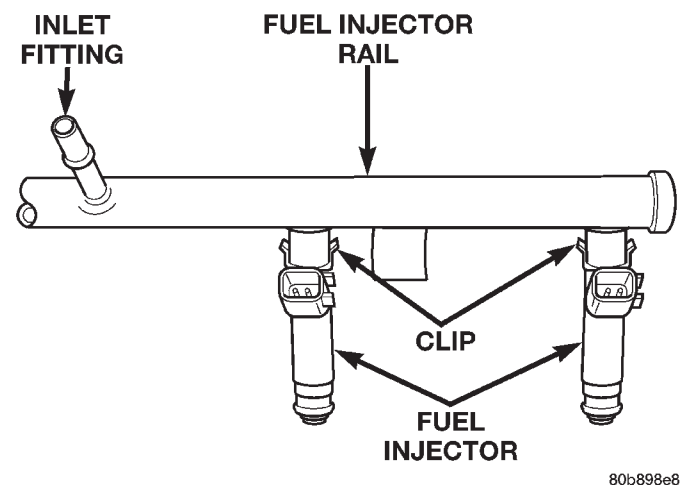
Fuel Injector Mounting—Typical (4.7L V-8 Engine Shown)
